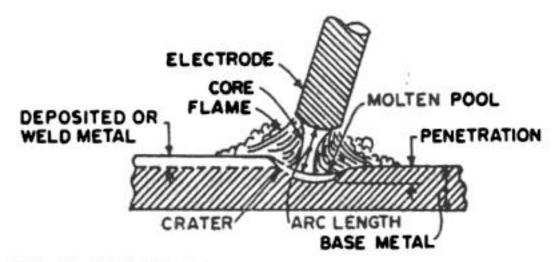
UNSHIELDED METAL ARC WELDING PROCESS
